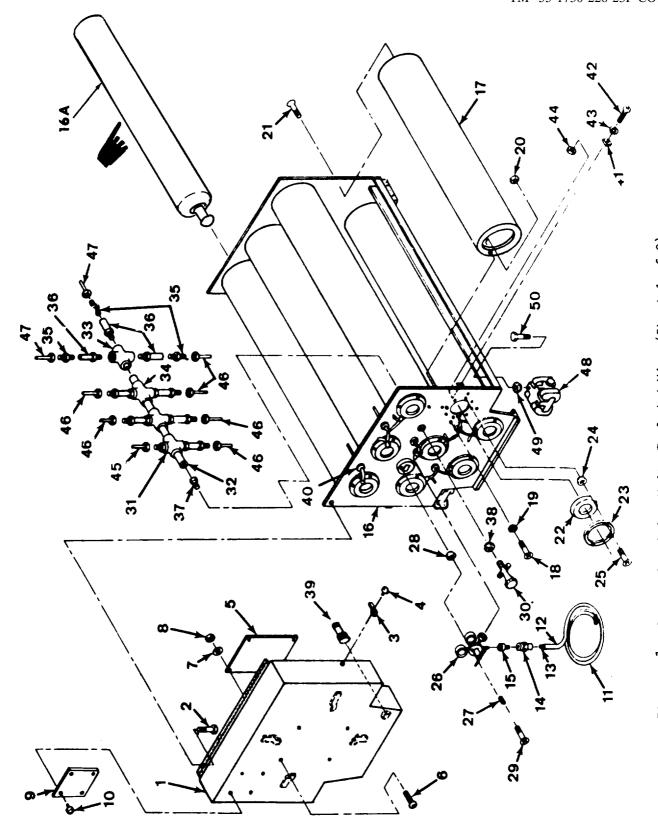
Oxygen Servicing Unit, Exploded View (Sheet 1 of 2)
